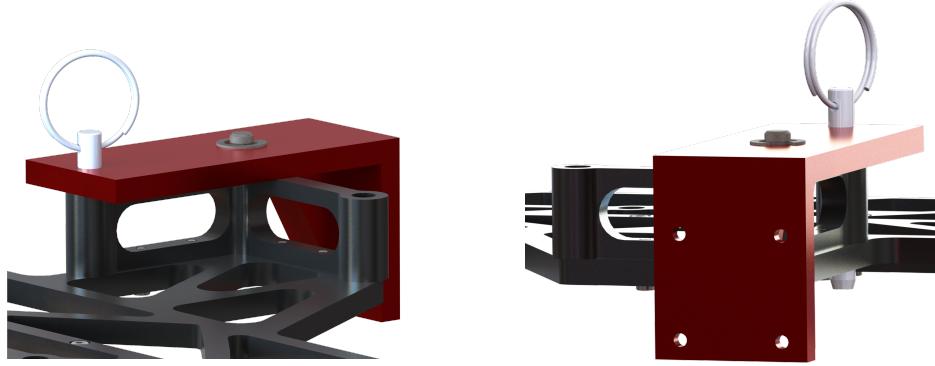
Two views of surge thruster swing assembly mounted to top plate of frame
